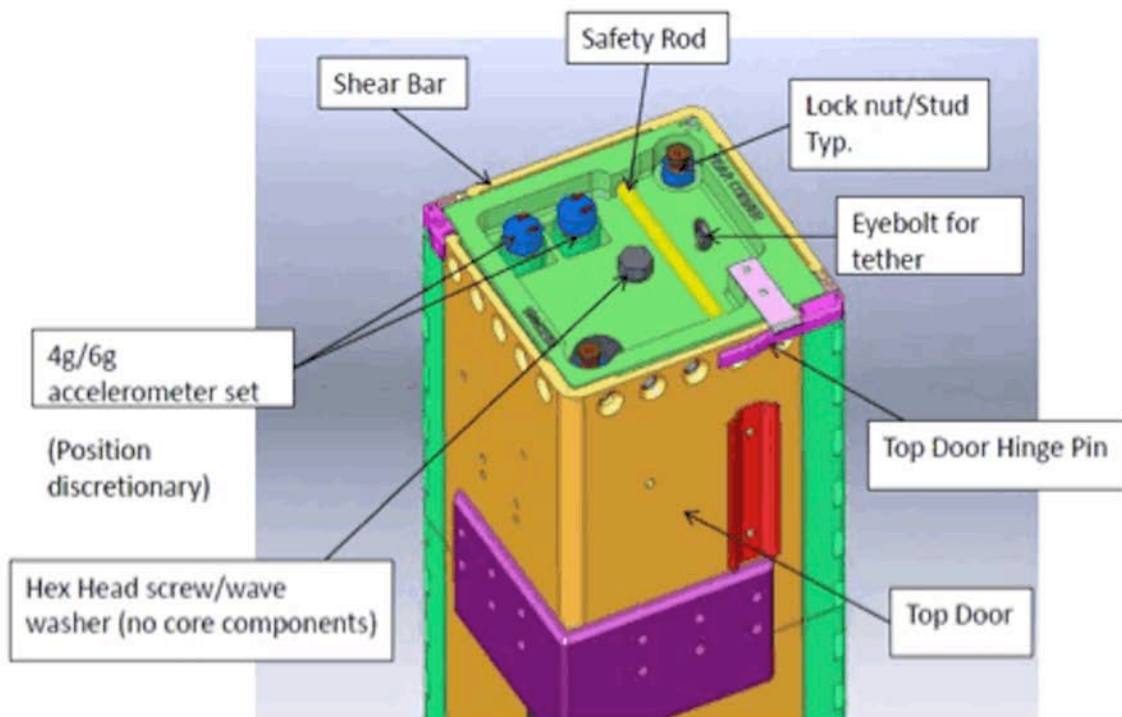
Clamshell with Removable Top Plate (RTP)
